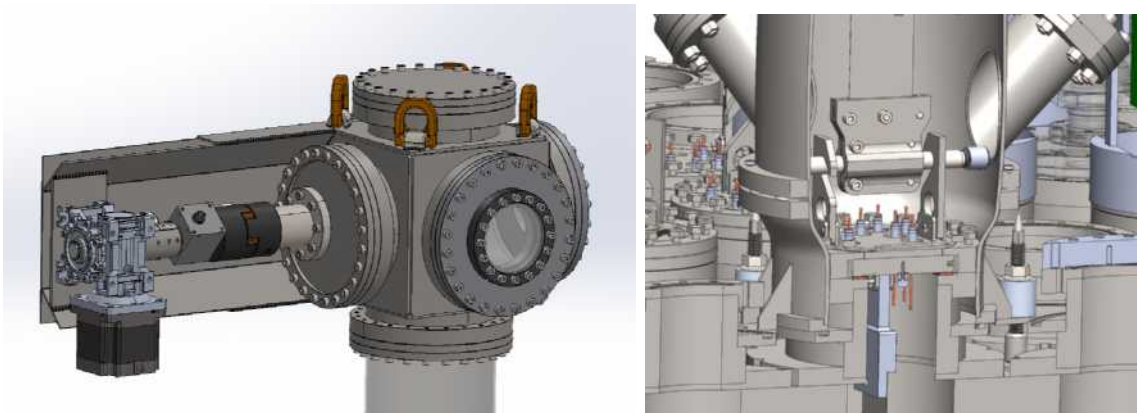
Legend-1000 Lock Design in Solidworks. Left: Winch drive train. Right: Cross section of magnetic coupling concept.
